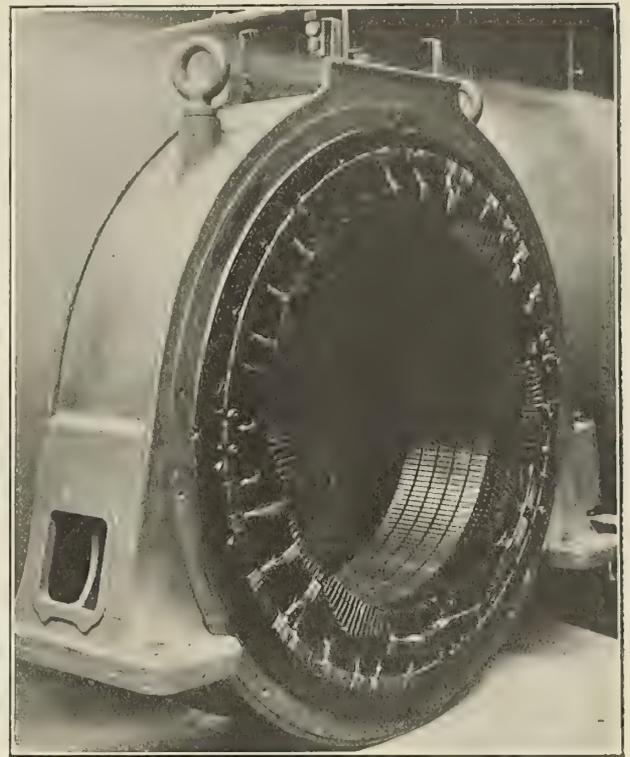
STATOR OF ALTERNATOR, WITH GUARDS REMOVED TO SHOW WINDINGS
